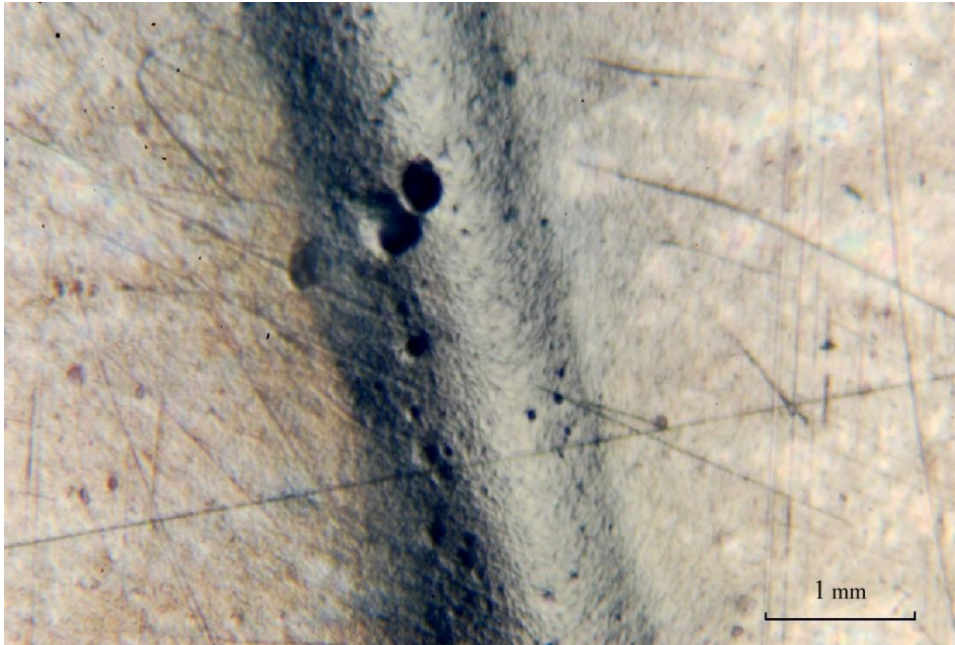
External view of the polyethylene film weld performed by transmission laser welding
